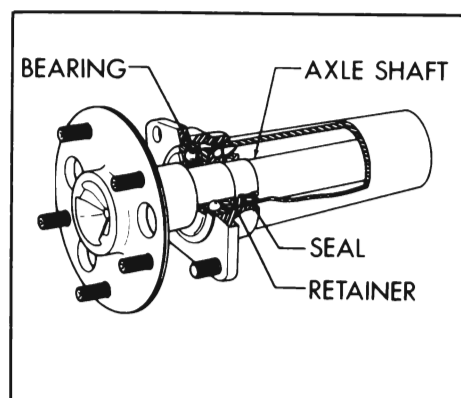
Rear Axle Shaft Bearing and Seal
